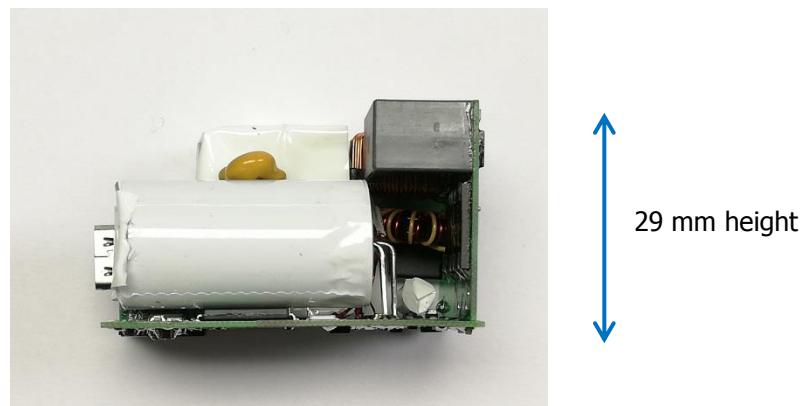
Populated Circuit Board Photograph, Entire Assembly.
